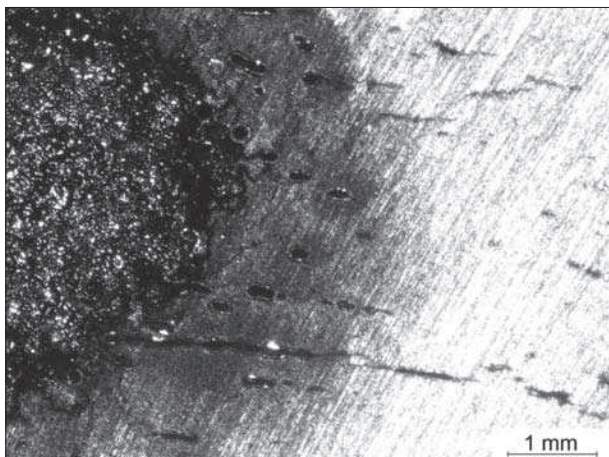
Steel sample crushed in plastic working – cross-section; visible cracks at cross-section
